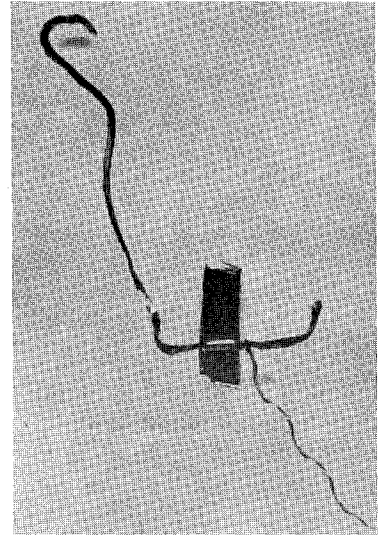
Photographs of chip produced by machining with M-Tool. Cutting conditions are the same as in Fig. 16.-[B].
